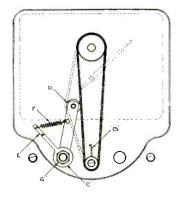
Front view of Models 686B, 786 and 822 dial mechanism showing newer type of take-up assembly in place.
